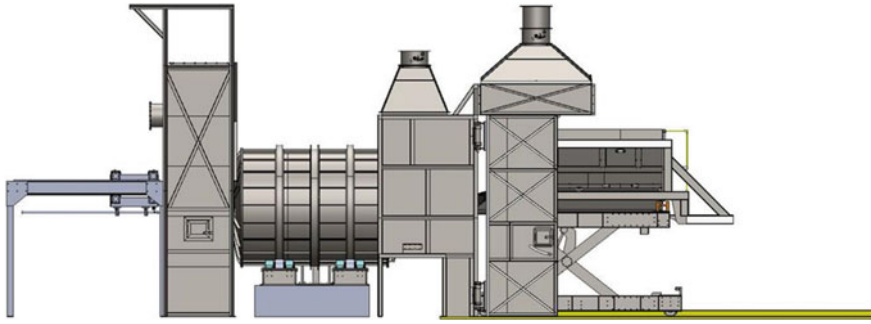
SK Metais pyrometallurgical equipment design: loader, rotary furnace, post-combustion chamber, burner, and hoods
